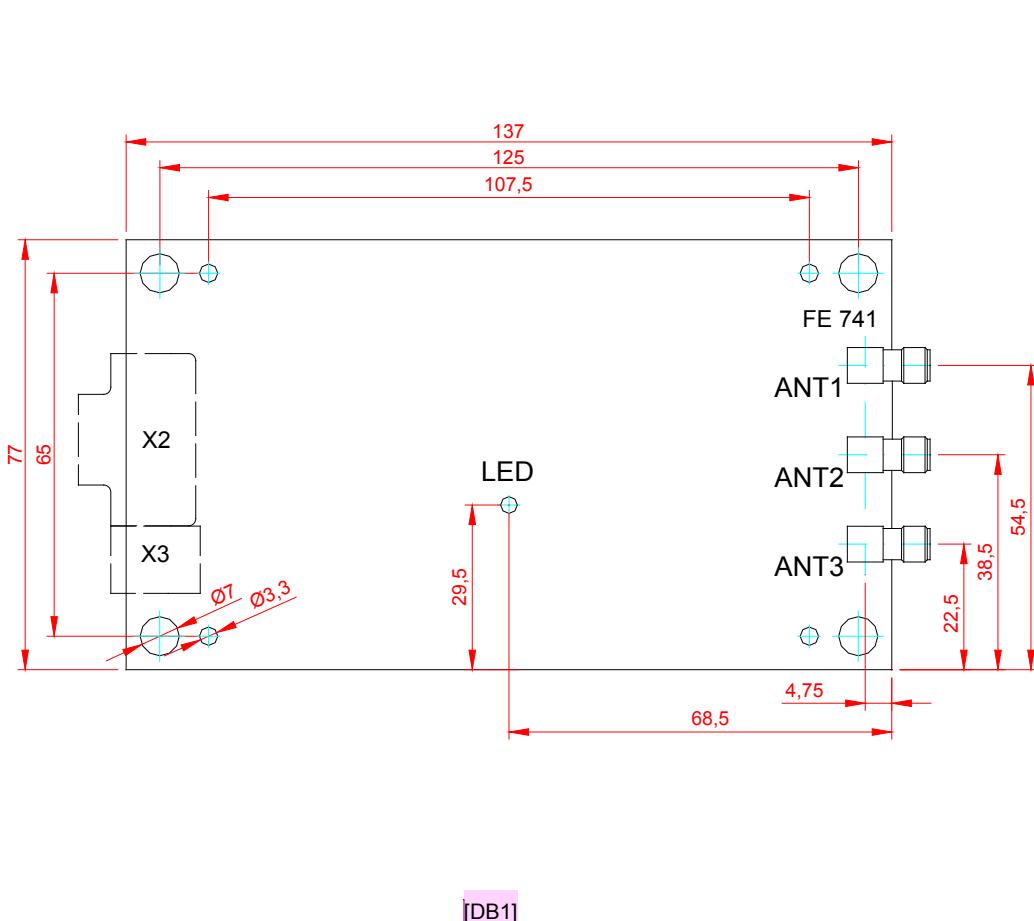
Dimensions of the housing version (all dimensions are in mm)
